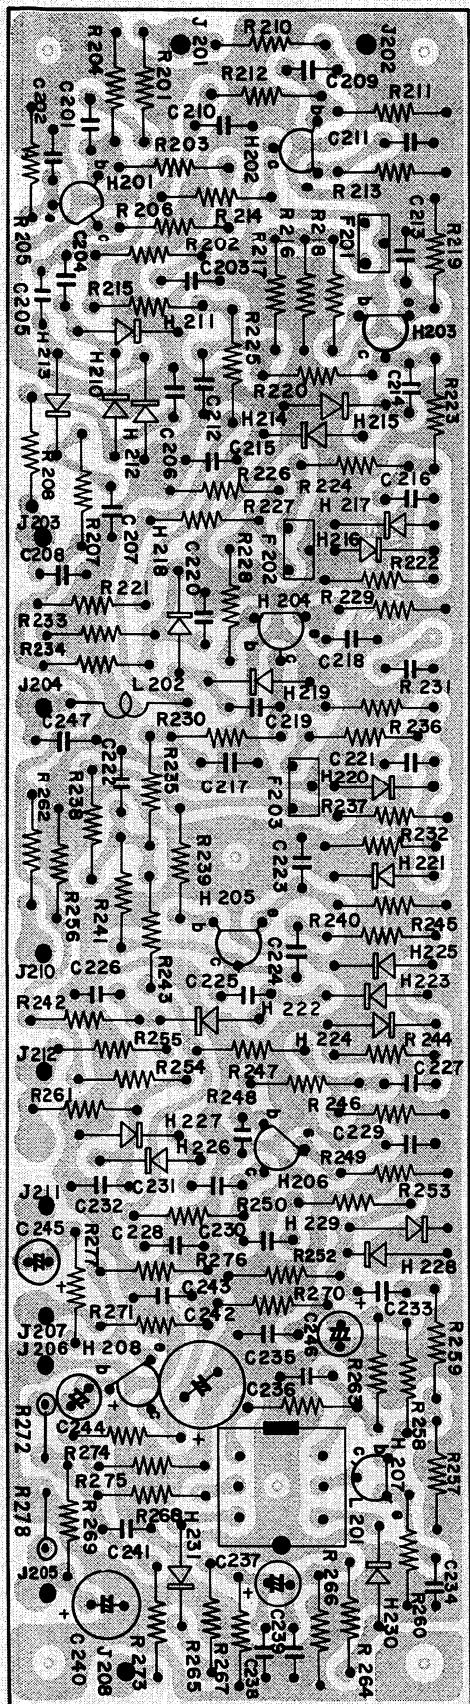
FM IF Amplifier Assembly P200 Component Locations
